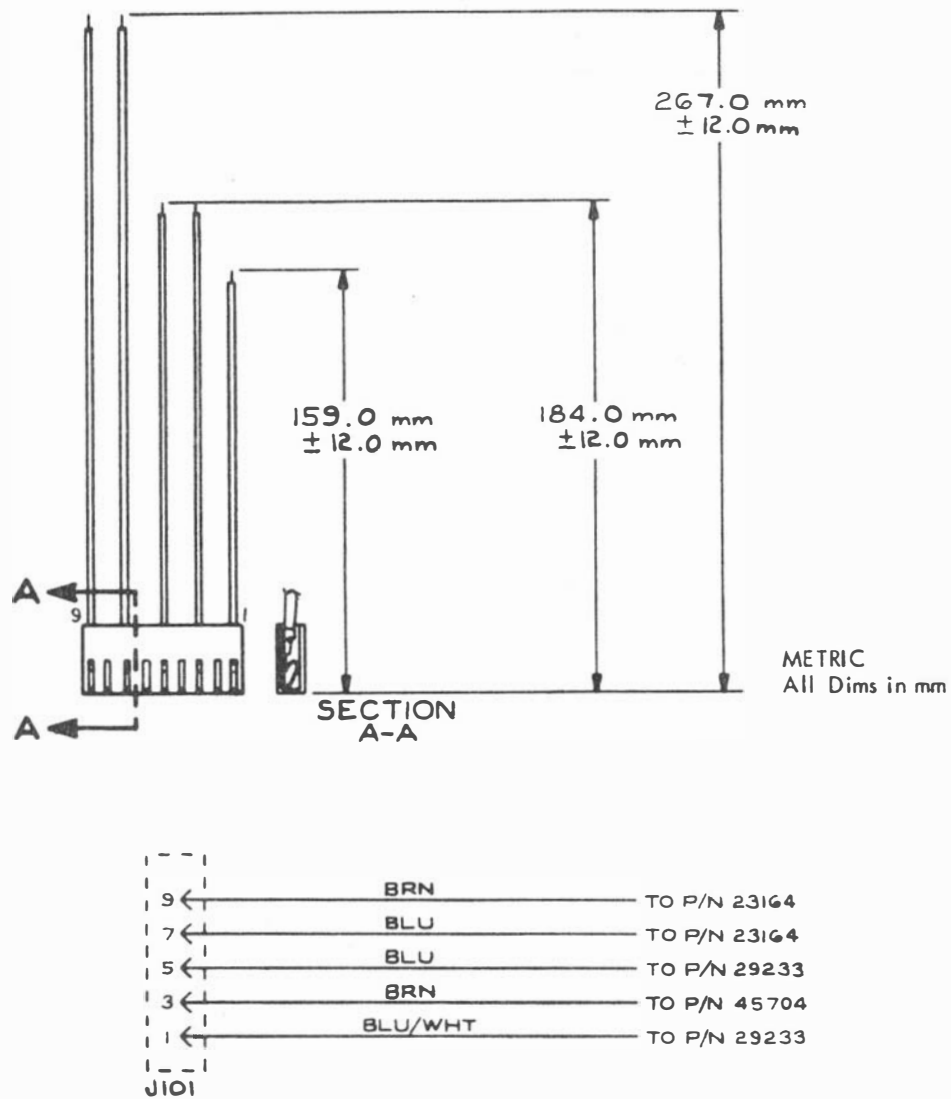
Back Panel-to-Power Supply Cable Assembly (P/N 47115)
